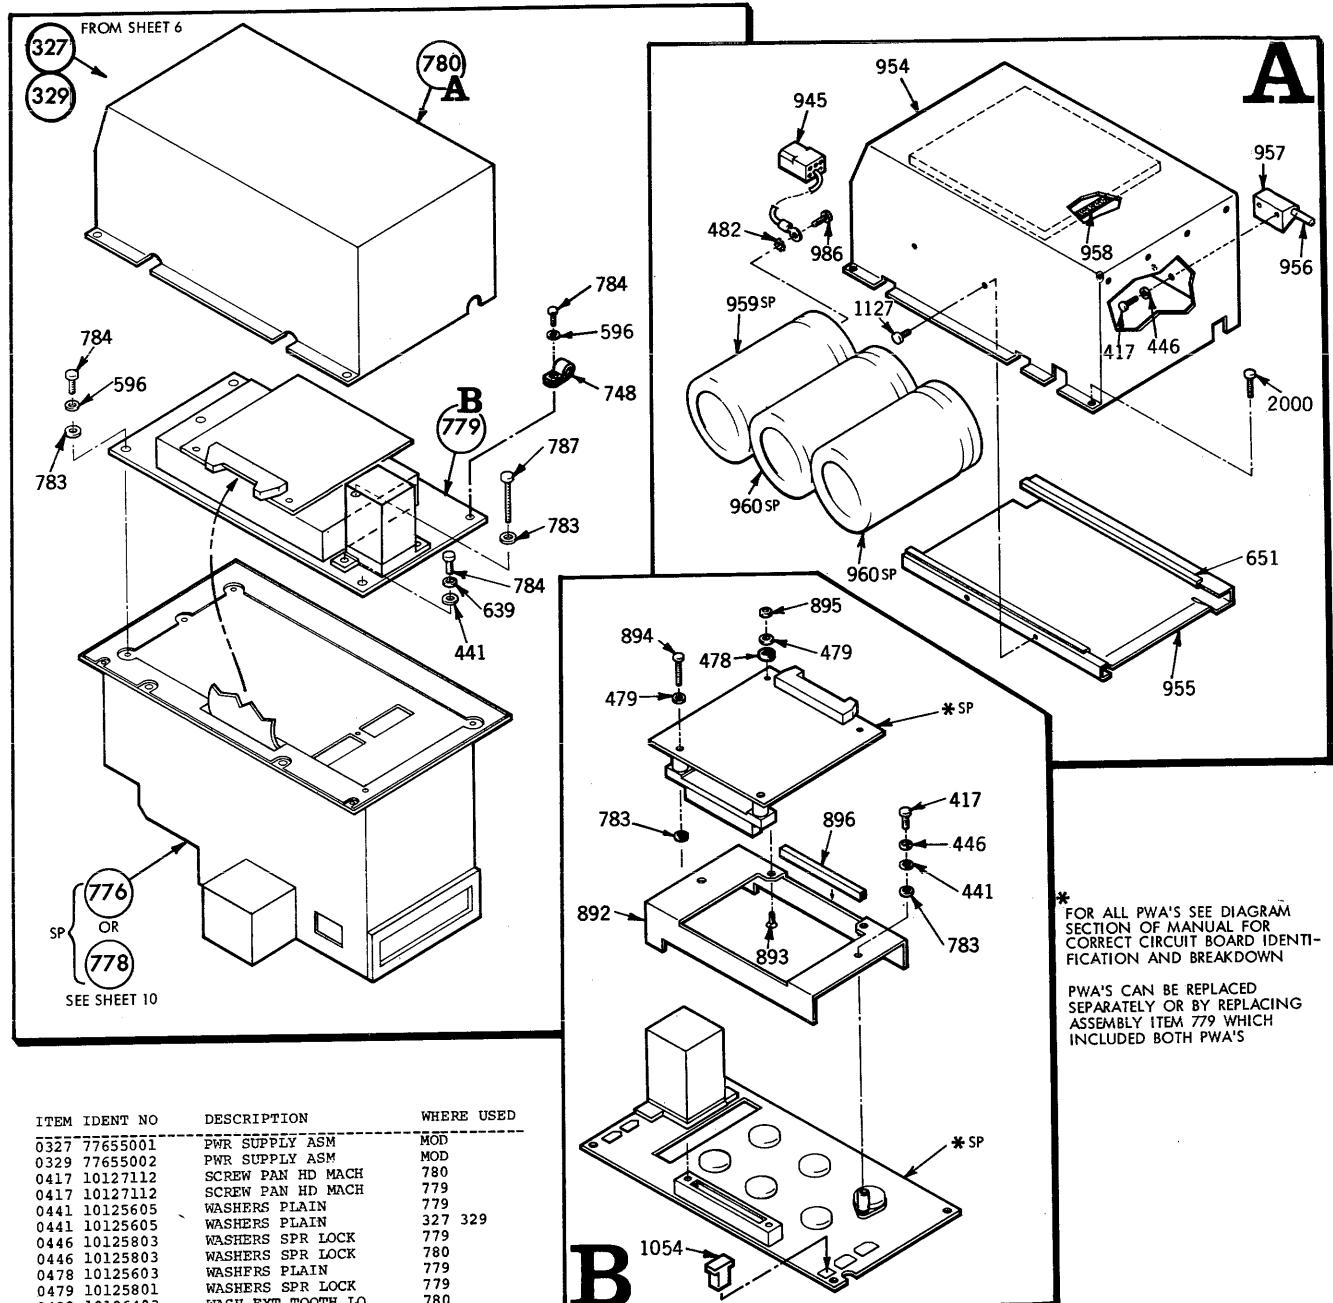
POWER SUPPLY (SHEET 1 OF 2)
